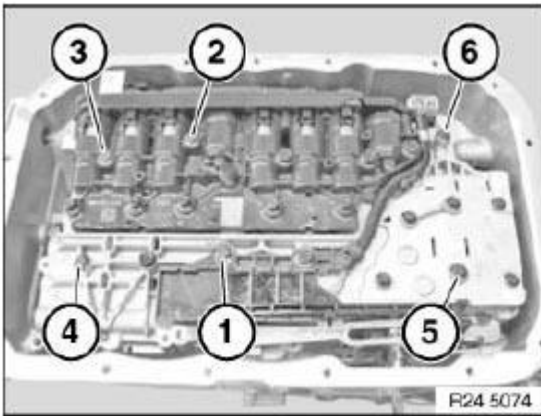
Identifying Automatic Transmission Bolts Tightening Sequence
